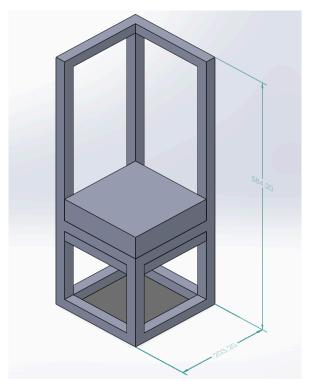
Front view of the SolidWorks assembly for the final prototype with dimensions in millimeters
